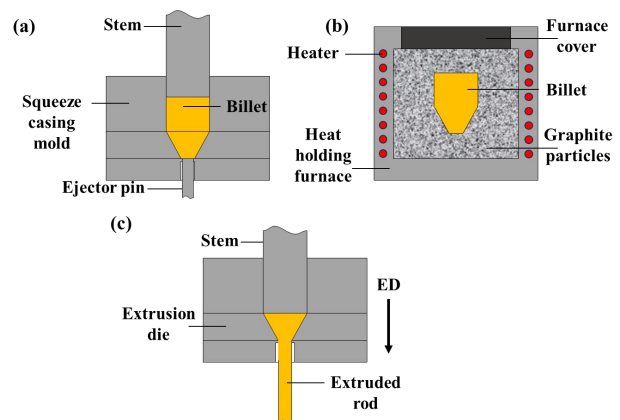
Schematic diagram of the rapid preheating process for squeeze casting billets: (a) squeeze casting; (b) rapid preheating; (c) hot extrusion.
